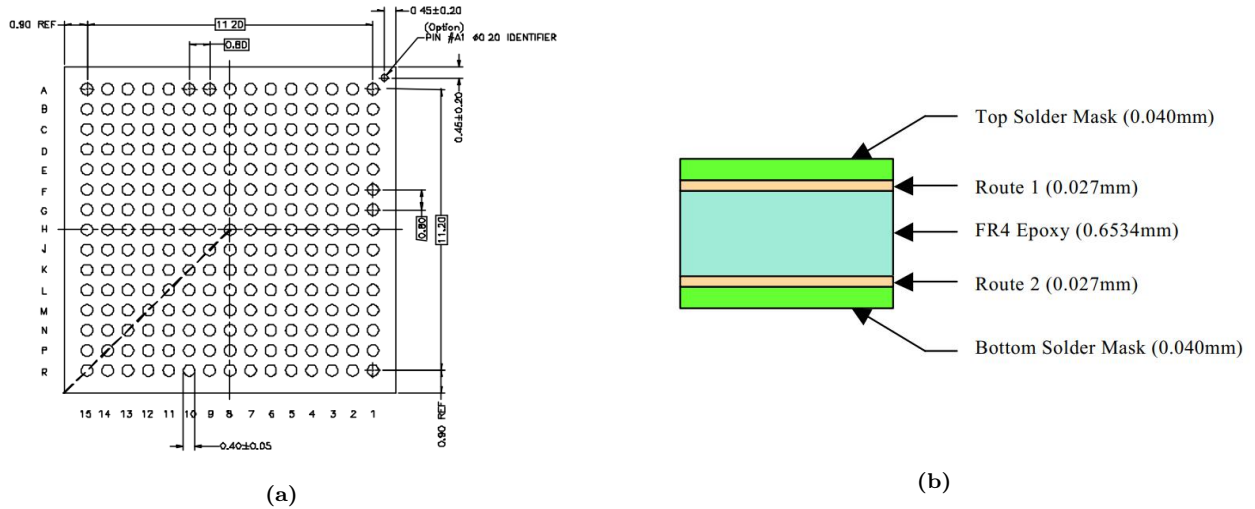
Package outline drawing (a) and Layer dimensions of pcb (b)
